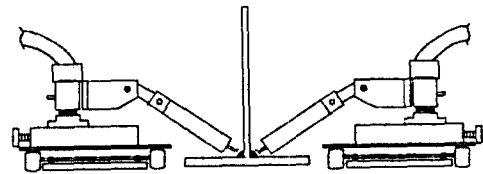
Sketch of experimental work for welding of the built-up beam
